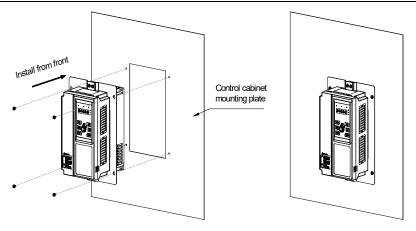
Embedded Installation Diagram of Plastic Structure 3. Wall mounting of sheet metal structure
